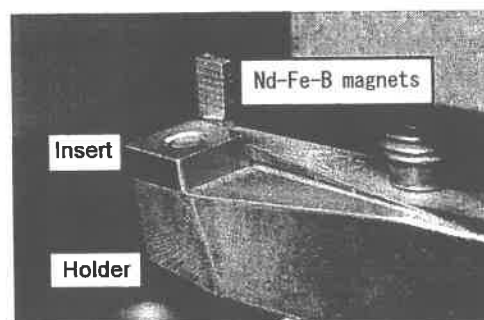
Tool holder and insert with Nd-Fe-B magnets.
